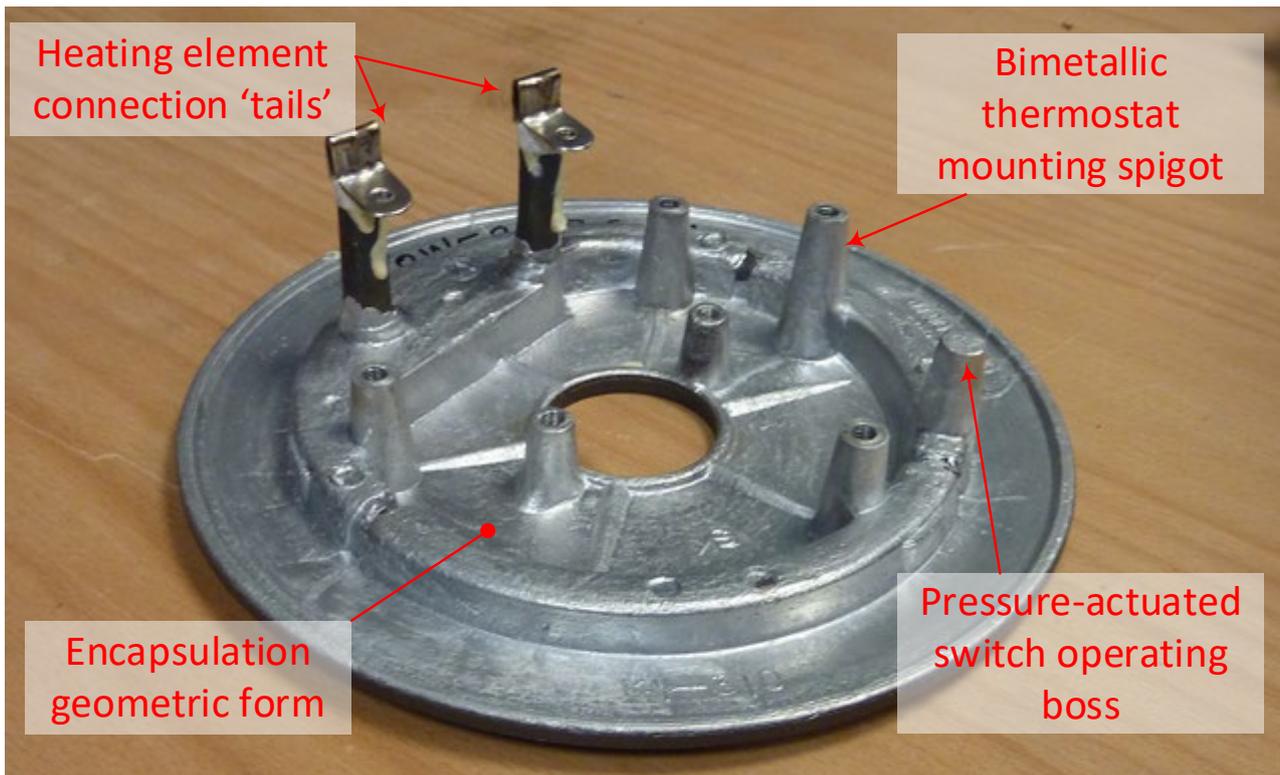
Underside view of hot-plate encapsulation showing pressure die-cast geometric form and salient features.
